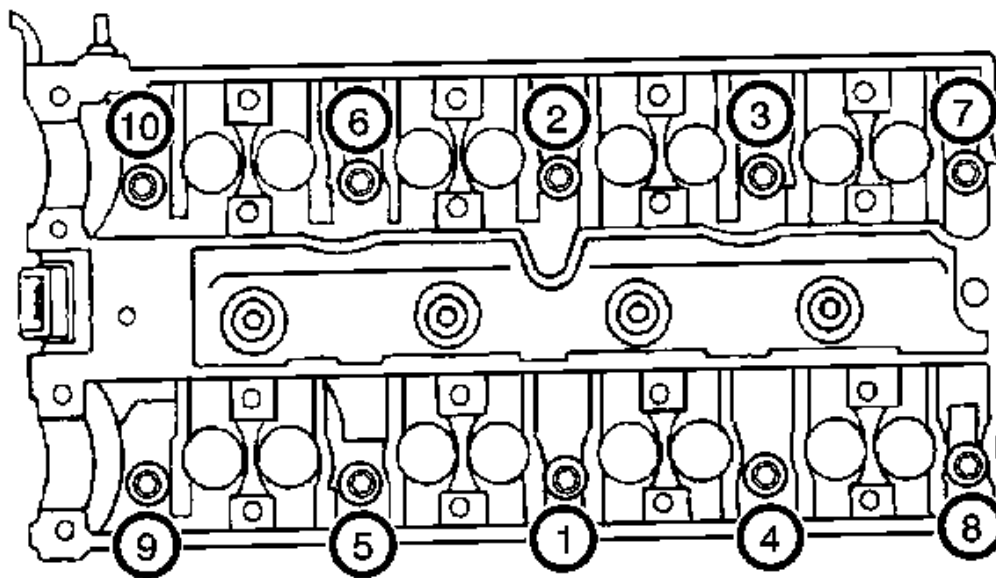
View Of Cylinder Head Bolt Tightening Sequence
